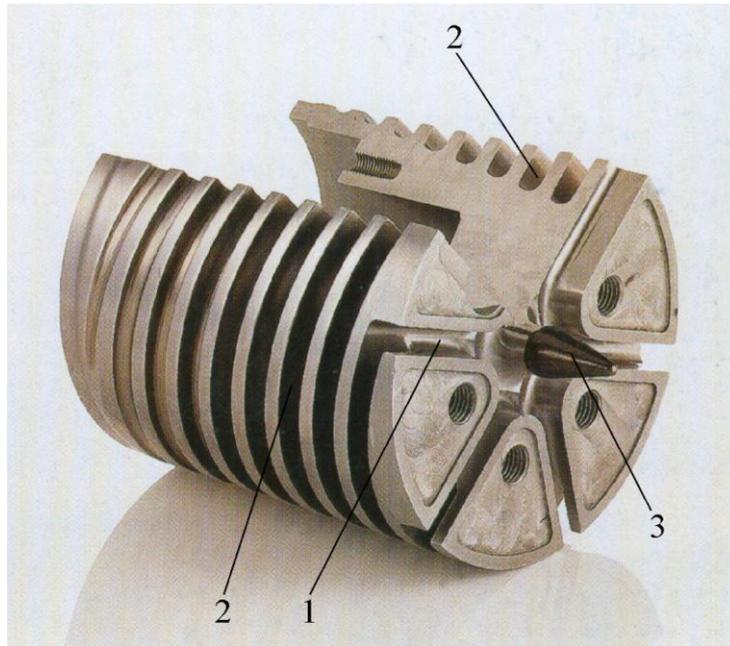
Example of cylindrical heart-shaped mandrels with a visible manifold (Guill Tool & Engineering USA)
